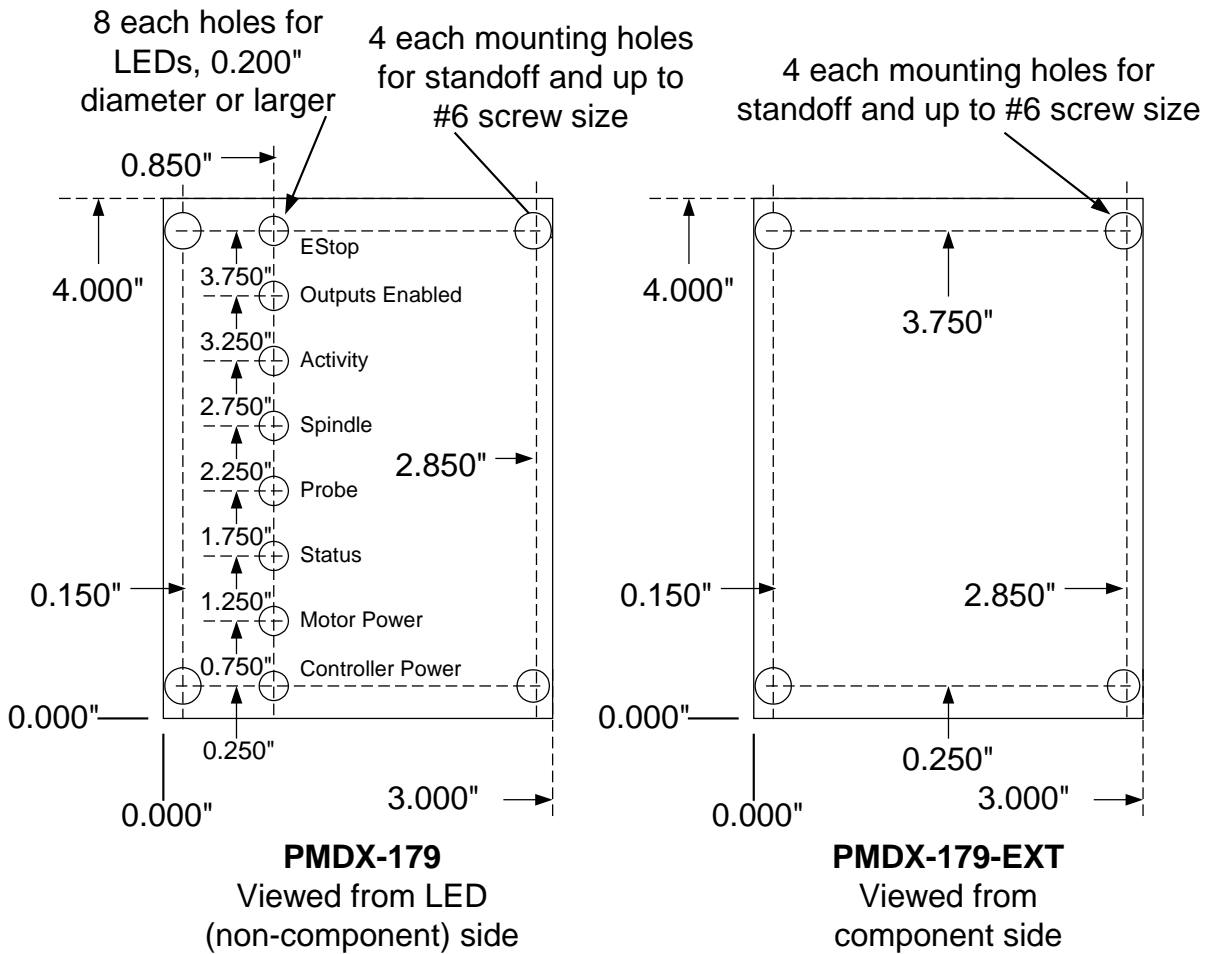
PMDX-179 Dimensions and Mounting Plate Holes
